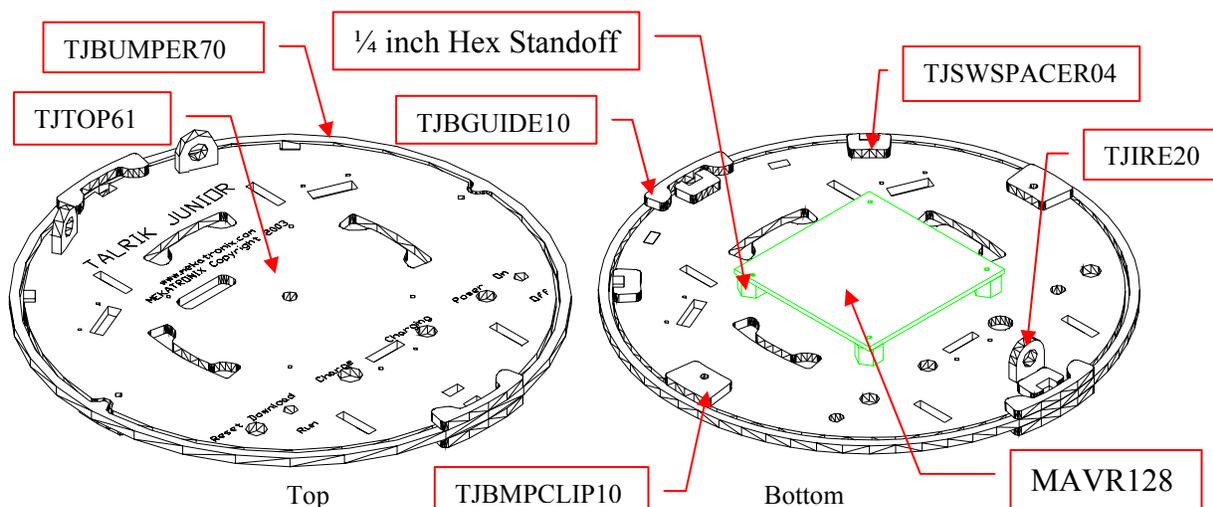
These two figures present the top and bottom view of the robot's top plate with the bumper, switch mounts, printed circuit board, and IR eyelets attached.
